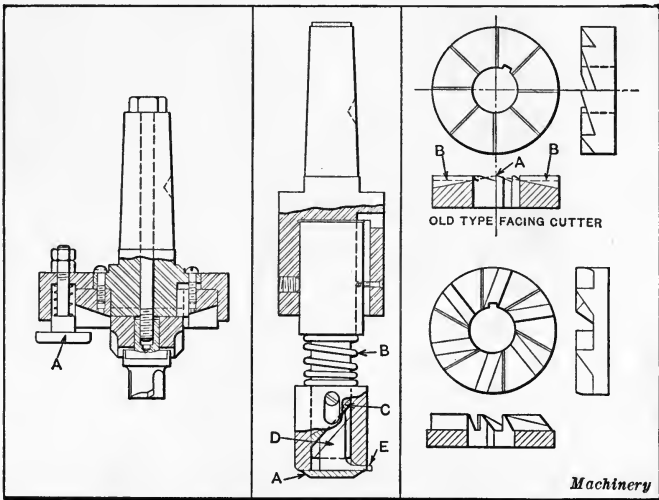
Type of Tool and Work-holding Fixture used on Parts where Accuracy in Tripping Feed is of Great Importance
